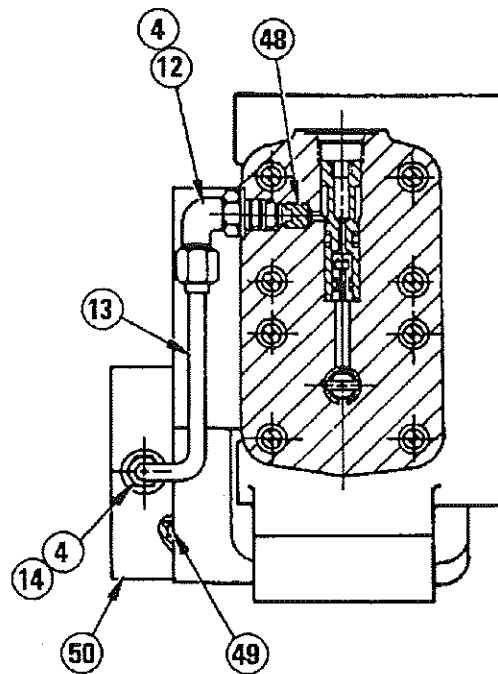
DUMP VALVE ASSEMBLY - CONTINUED
